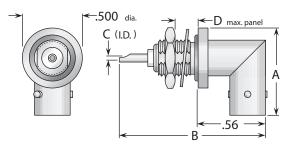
(Right angle bulkhead jack, front mount, with mounting gasket)
